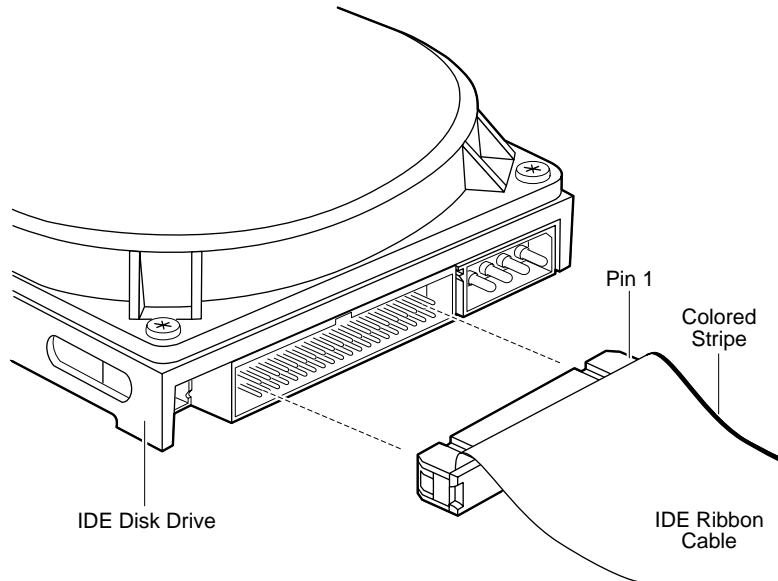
Connecting the IDE Ribbon Cable to the First IDE Drive
